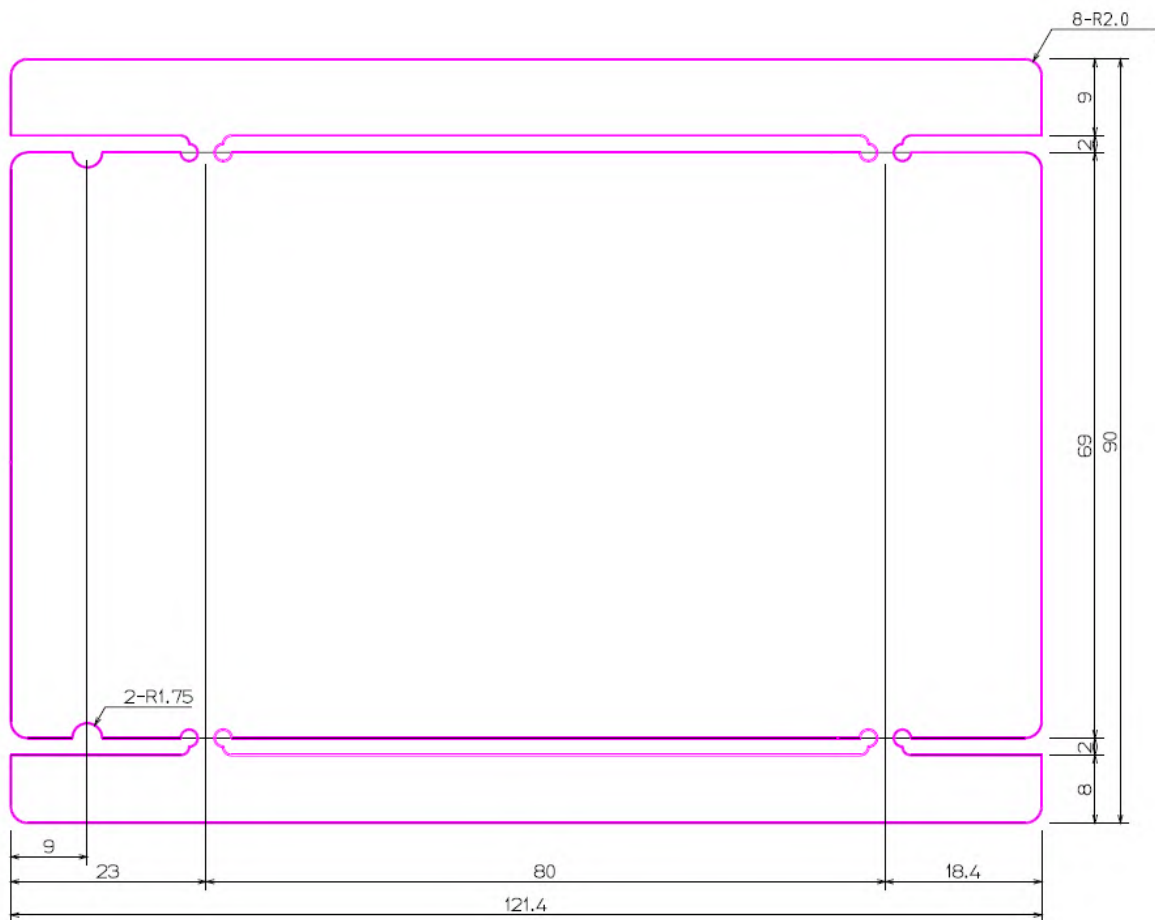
Board Dimensions (inclusive of wastable substrate)
